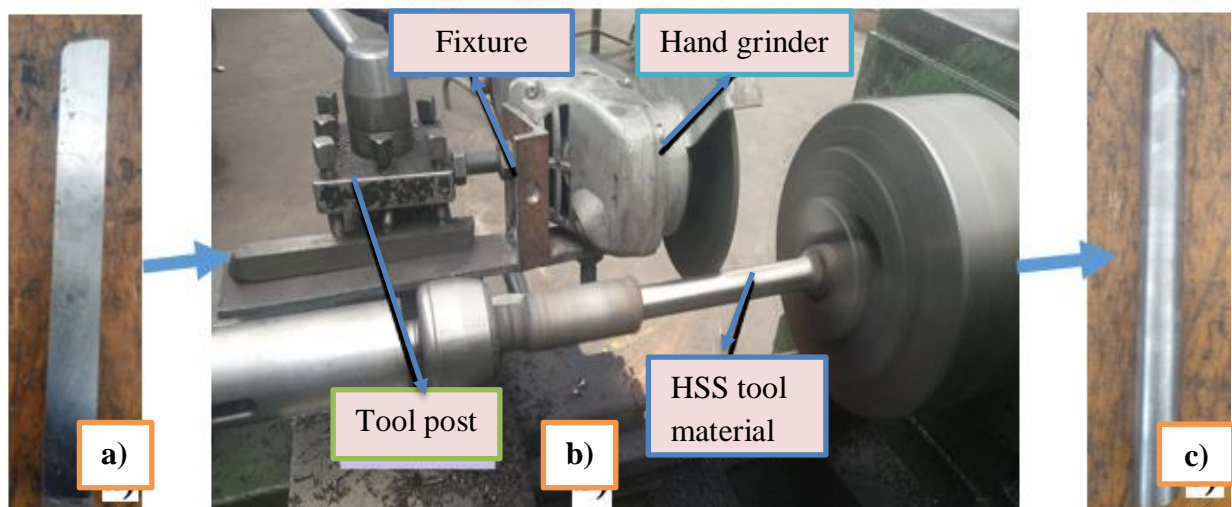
8 a) square shape HSS tool b) Cylindrical grinding operations setup on lathe machine by using hand grinder by additional attachment. c) After grinding round shape HSS tool material.
